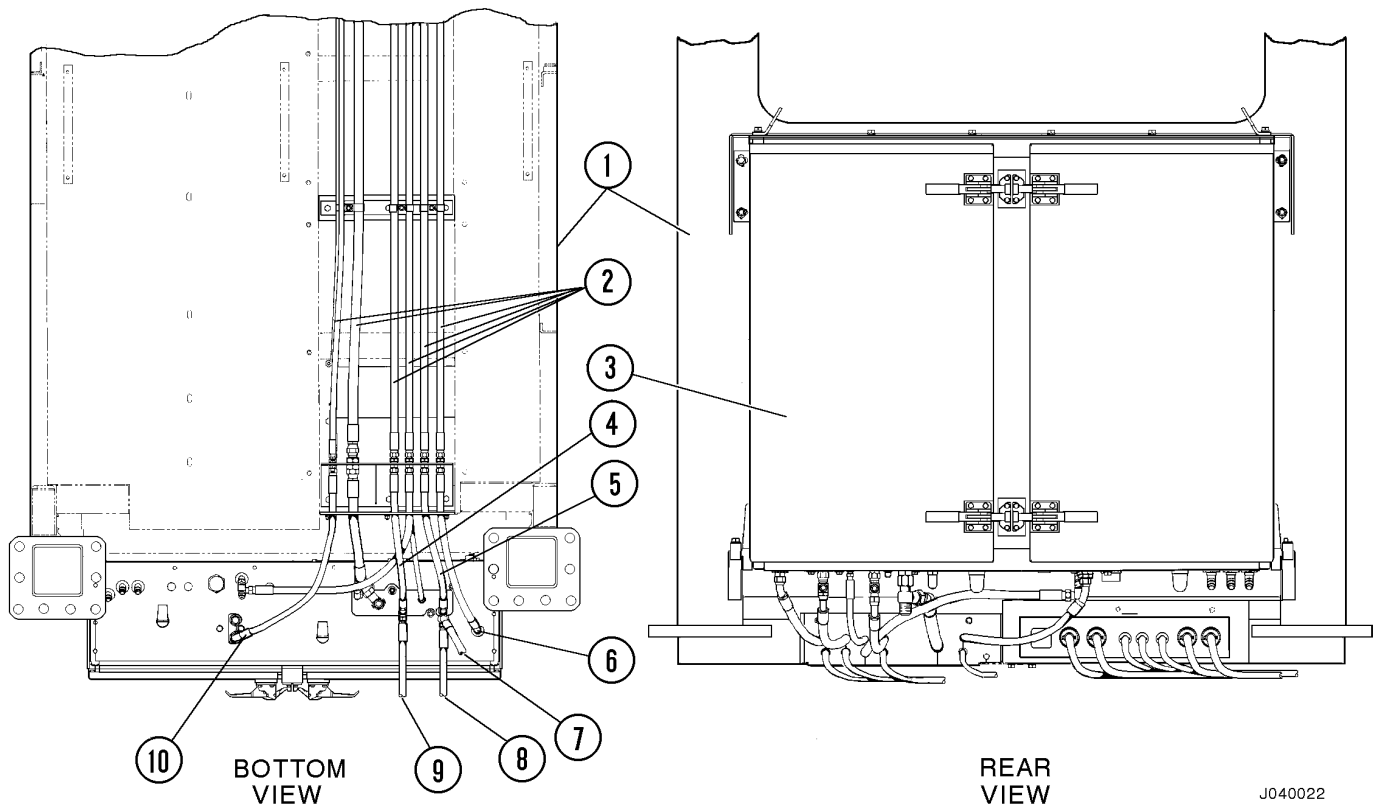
HYDRAULIC COMPONENTS CABINET
